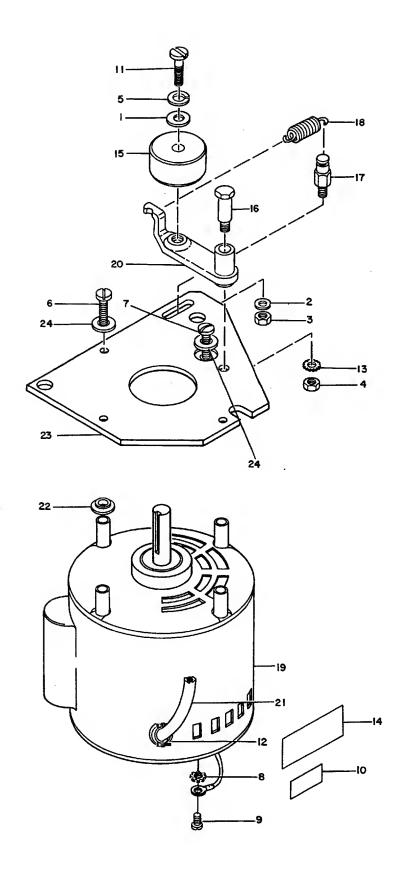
MOTOR ORIVE ASSEMBLY. SEE LIST 14.
